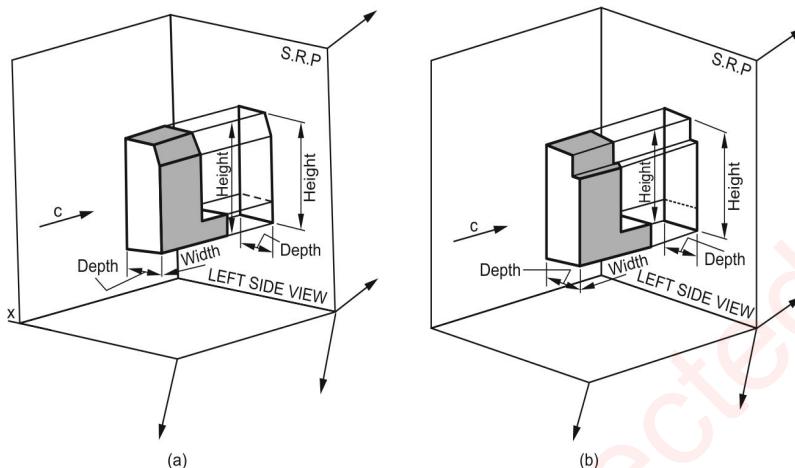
(a) Pictorial arrangement for obtaining the left side view of the solid with chamfer
